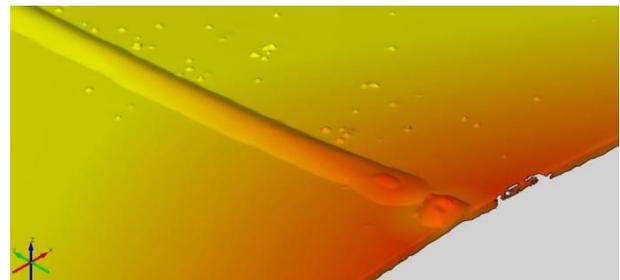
The weld metal spatter close-up after automated GMAW
